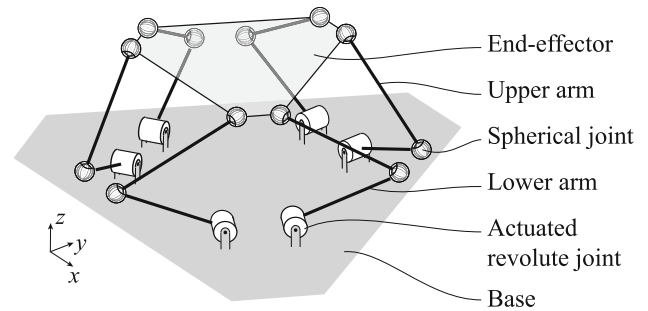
Schematic overview of the flexure-based hexapod. The spherical flexure joints contain the flexible elements: each of the twelve spherical flexure joints consists of six folded sheet flexures
